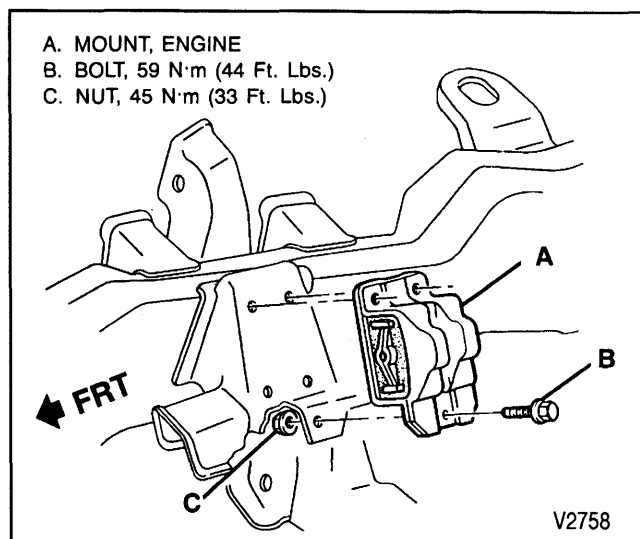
Front Engine Mounting Brackets to Frame (K-Models)
